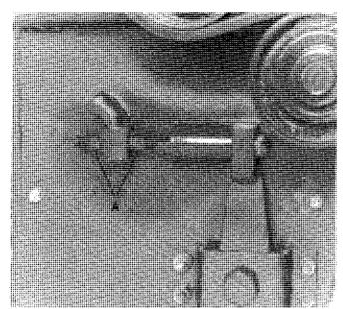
DRIVE END ADJUSTMENT (Shield removed for clarity)
